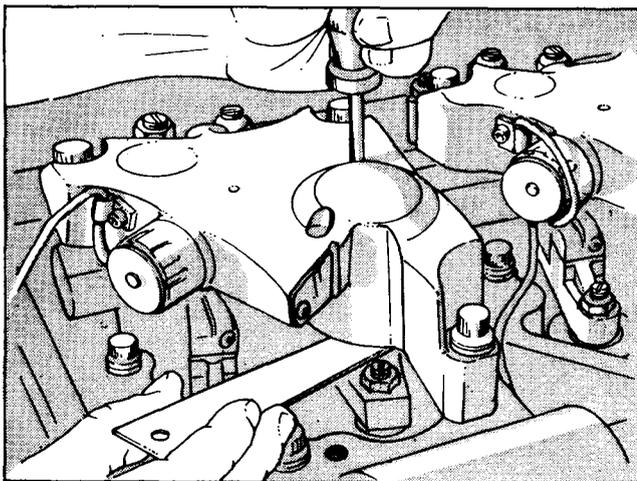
, (OM1063L). Adjusting crosshead to slave piston clearance
